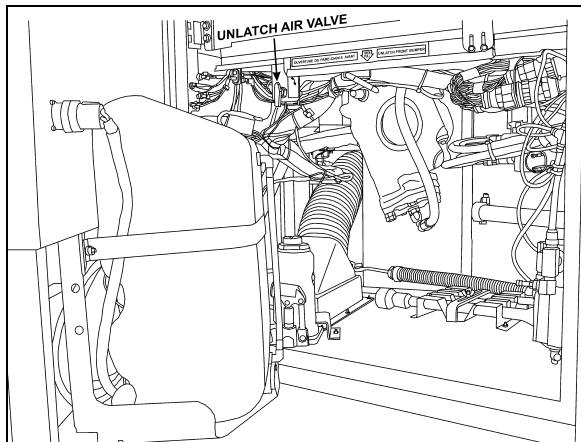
EXTERIOR UNLATCH AIR VALVE 12209
